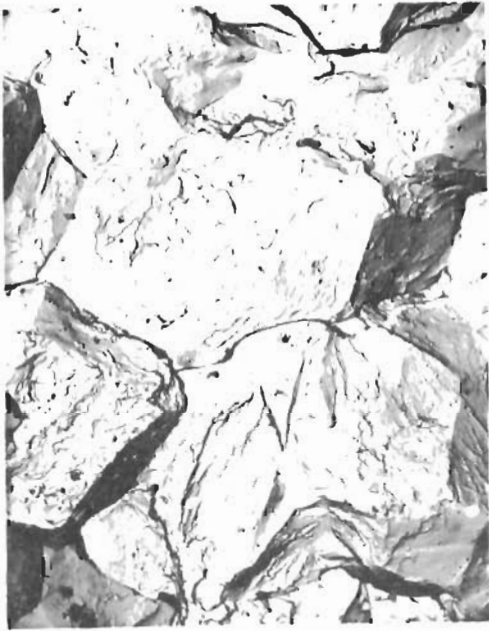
Axle Beam Failure Through Axle Design 1/62 AISI 4340 (260-280 ksi UTS)
